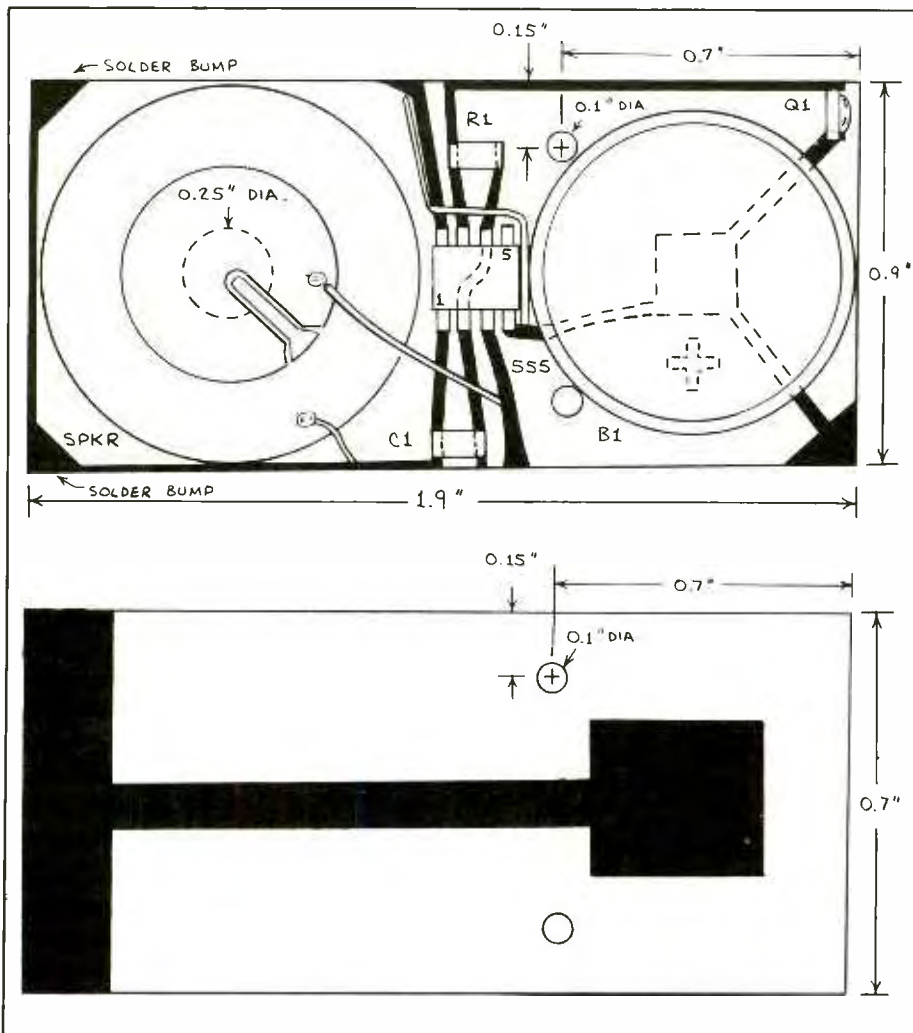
Assembly details for the light-probe circuit (upper) and a switch board for the light-probe circuit (lower).
